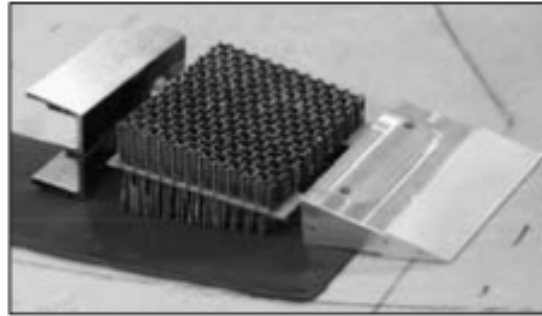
DARPA Smart Wing assembled segment[6]
